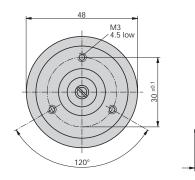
KINAX 2W2 with special drive shaft at front only, Ø 1/4", length 12 mm.
